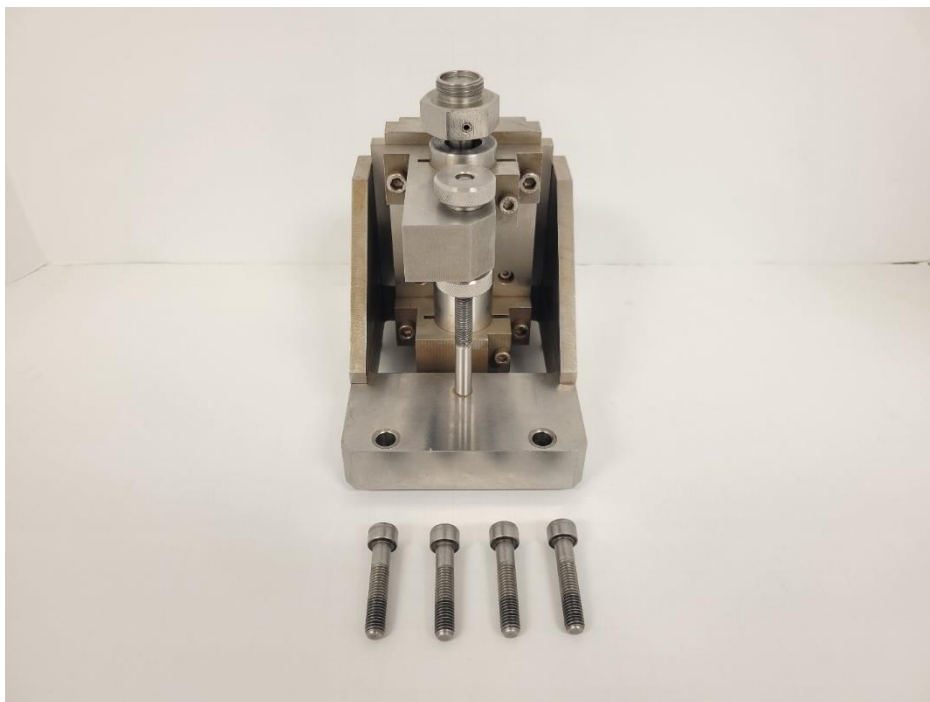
Confining cell assembly step 4: insert the top cap spindle into the vertical bearing assembly and use the two milled knobs to lock the vertical bearing assembly into its highest position.
